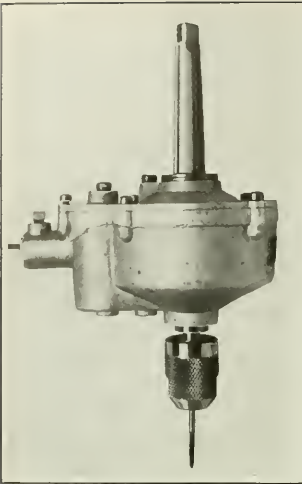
Tapping Attachment made by the Eastern Tube & Tool Co., Inc.
